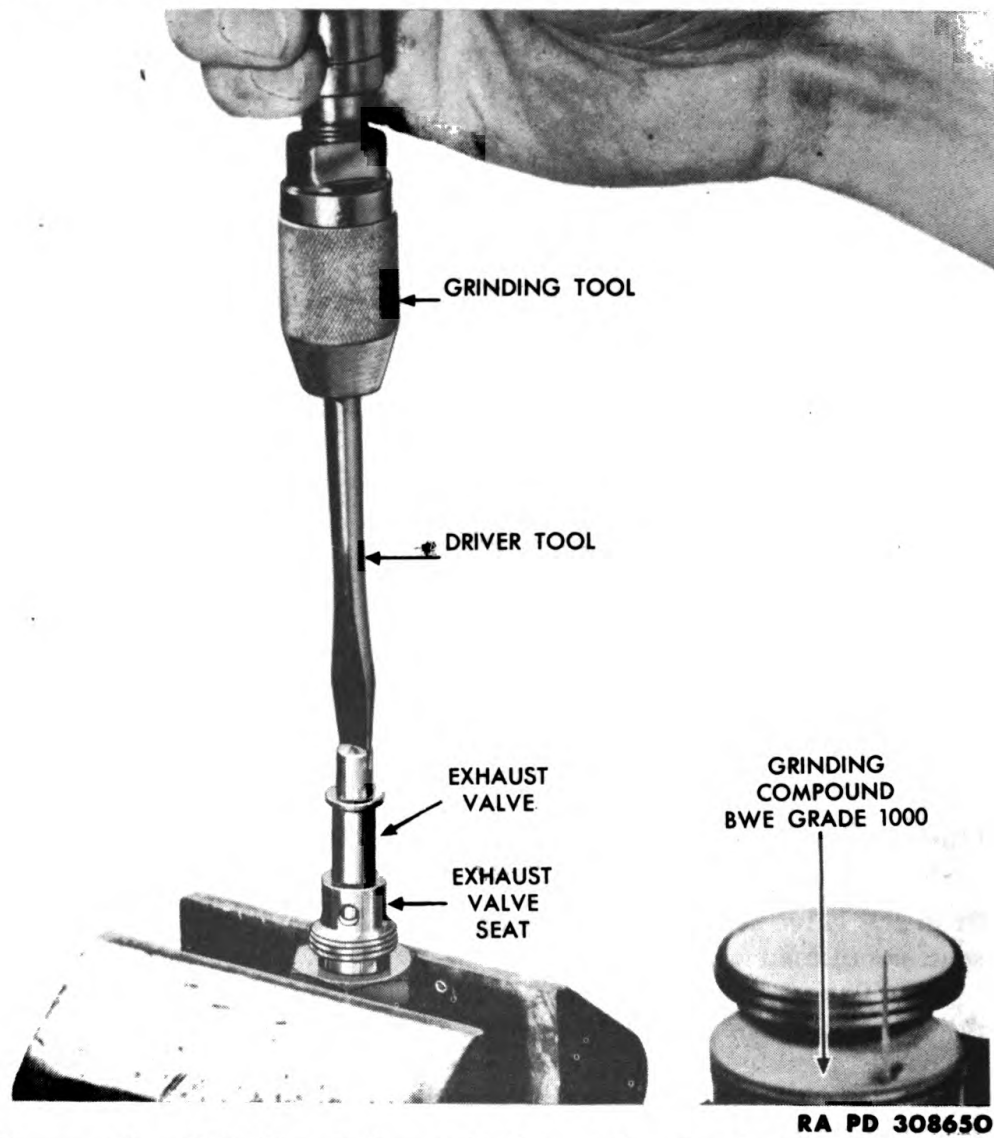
Grinding Exhaust Valve, Using Tools 41-T-3381-15 and 41-B-661
